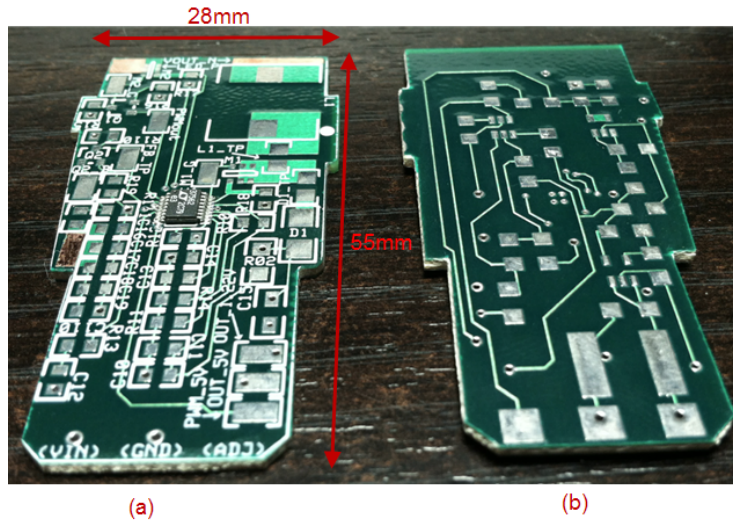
DC Light Bulb Custom 4-Layer PCB After Being Cut to Size, (a) Top Layer, (b) Bottom Layer.
